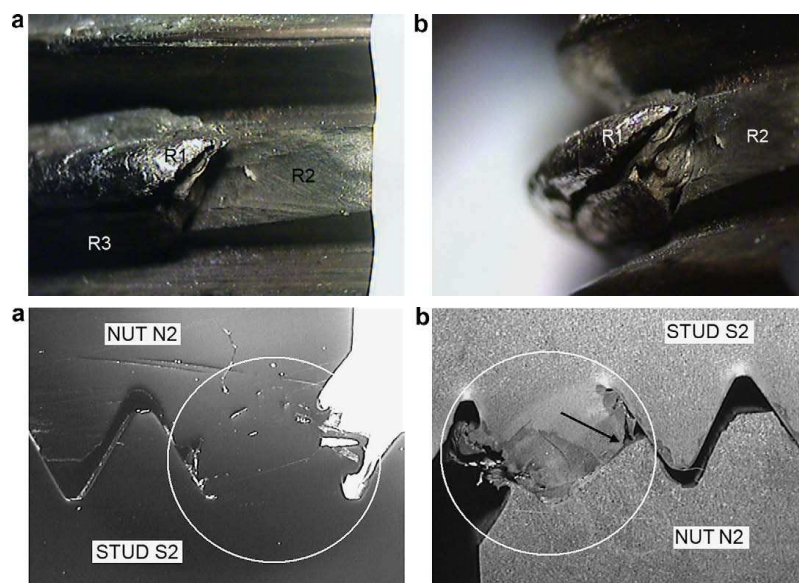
Cracked stud and cold welding between threads [4]
